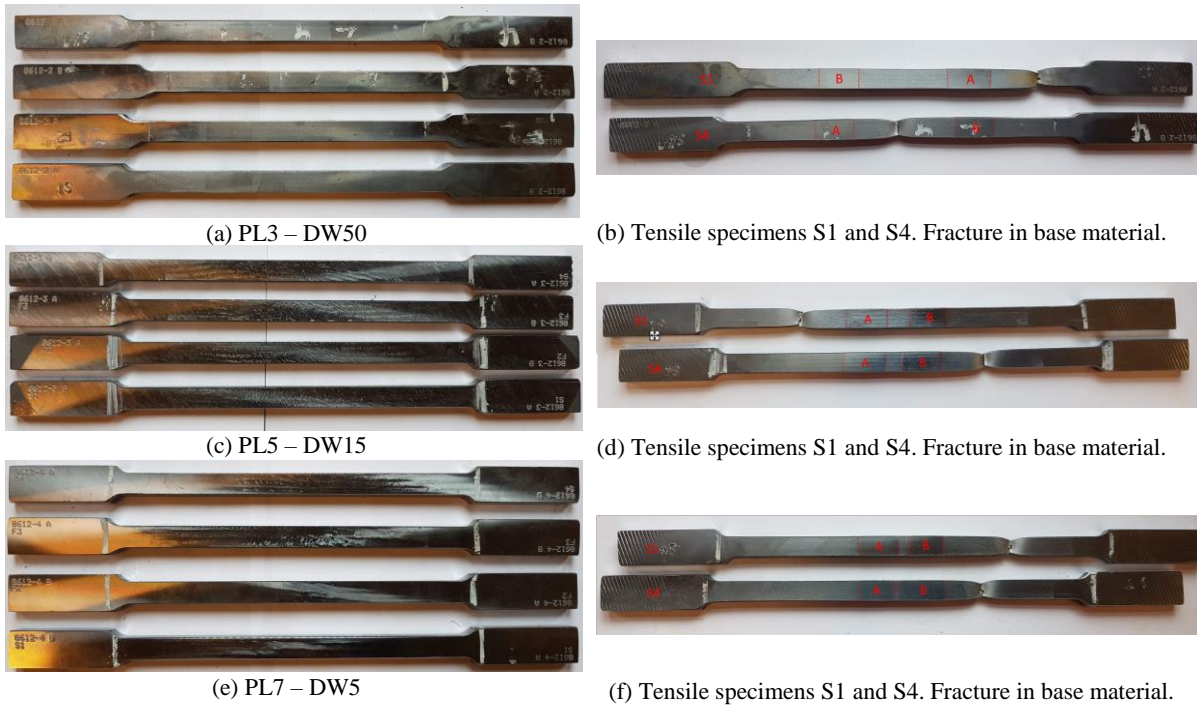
Tensile test. I Figure 2 34 we see the dimensions of the tensile specimens.
